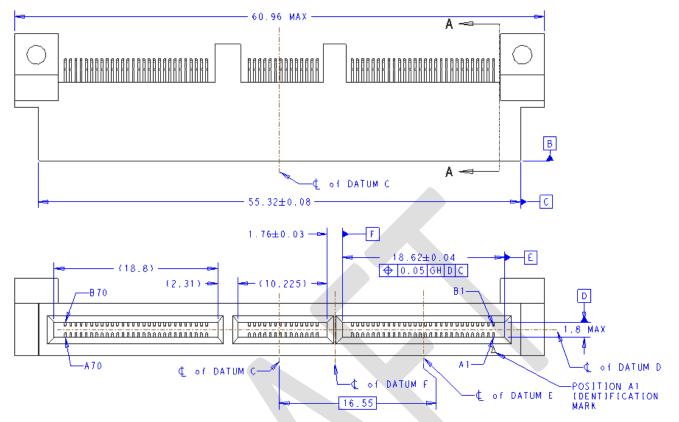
4C STRADDLE MOUNT CONNECTOR DIMENSIONS - FRONT VIEW (MM)
